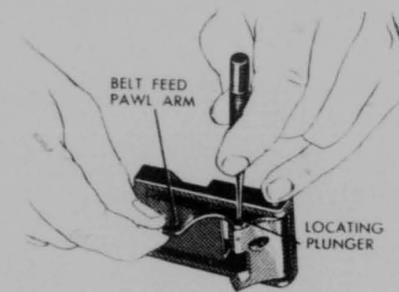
Depressing Locating Plunger to Remove Belt Feed Pawl Arm.
